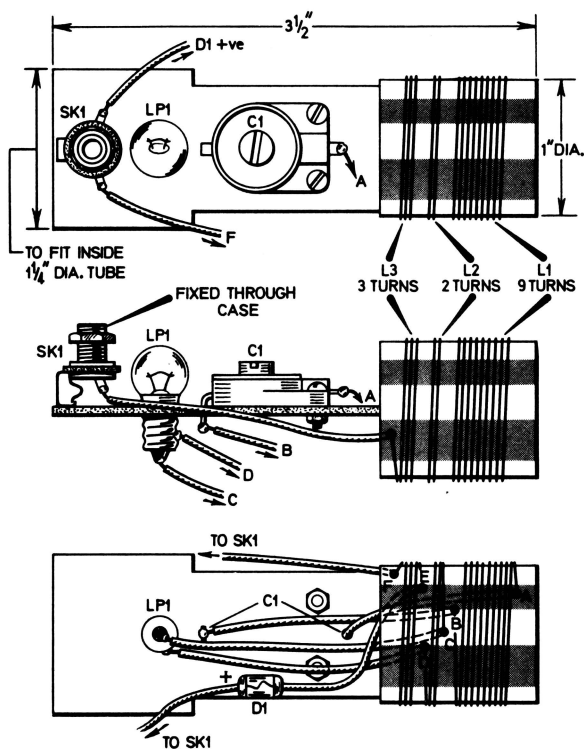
Constructional details showing the complete unit without the case. The three views show the top, side and underside of the unit. SK1 is mounted through the outer case.
